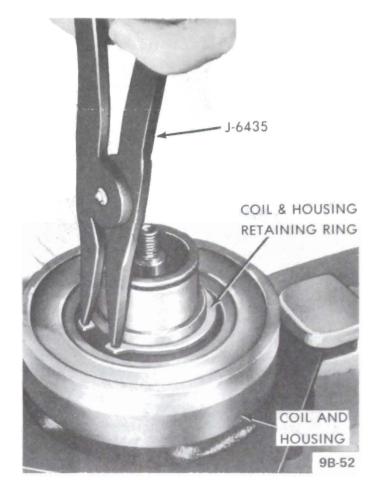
B-60 Removing or Installing Coil and Housing Retainer Ring
